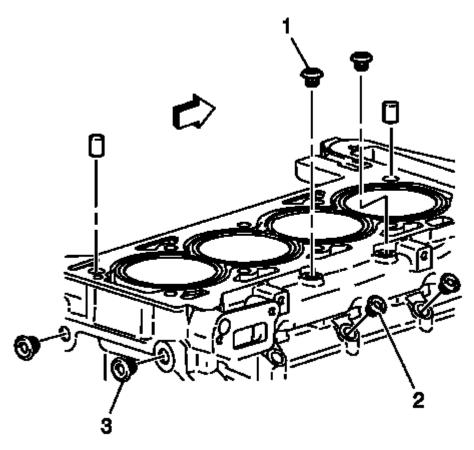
Locating Block Plugs Courtesy of GENERAL MOTORS COMPANY
